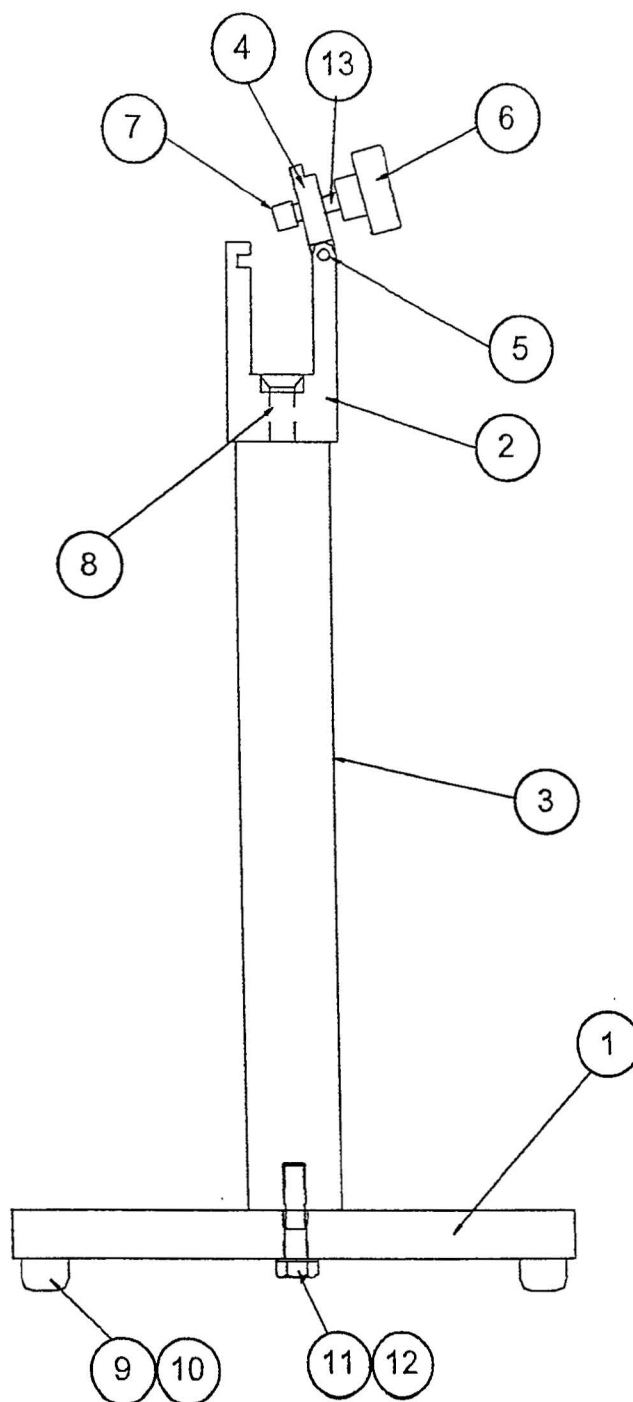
POWER CRIMP STAND ASSEMBLY - DWG-A19006-1
